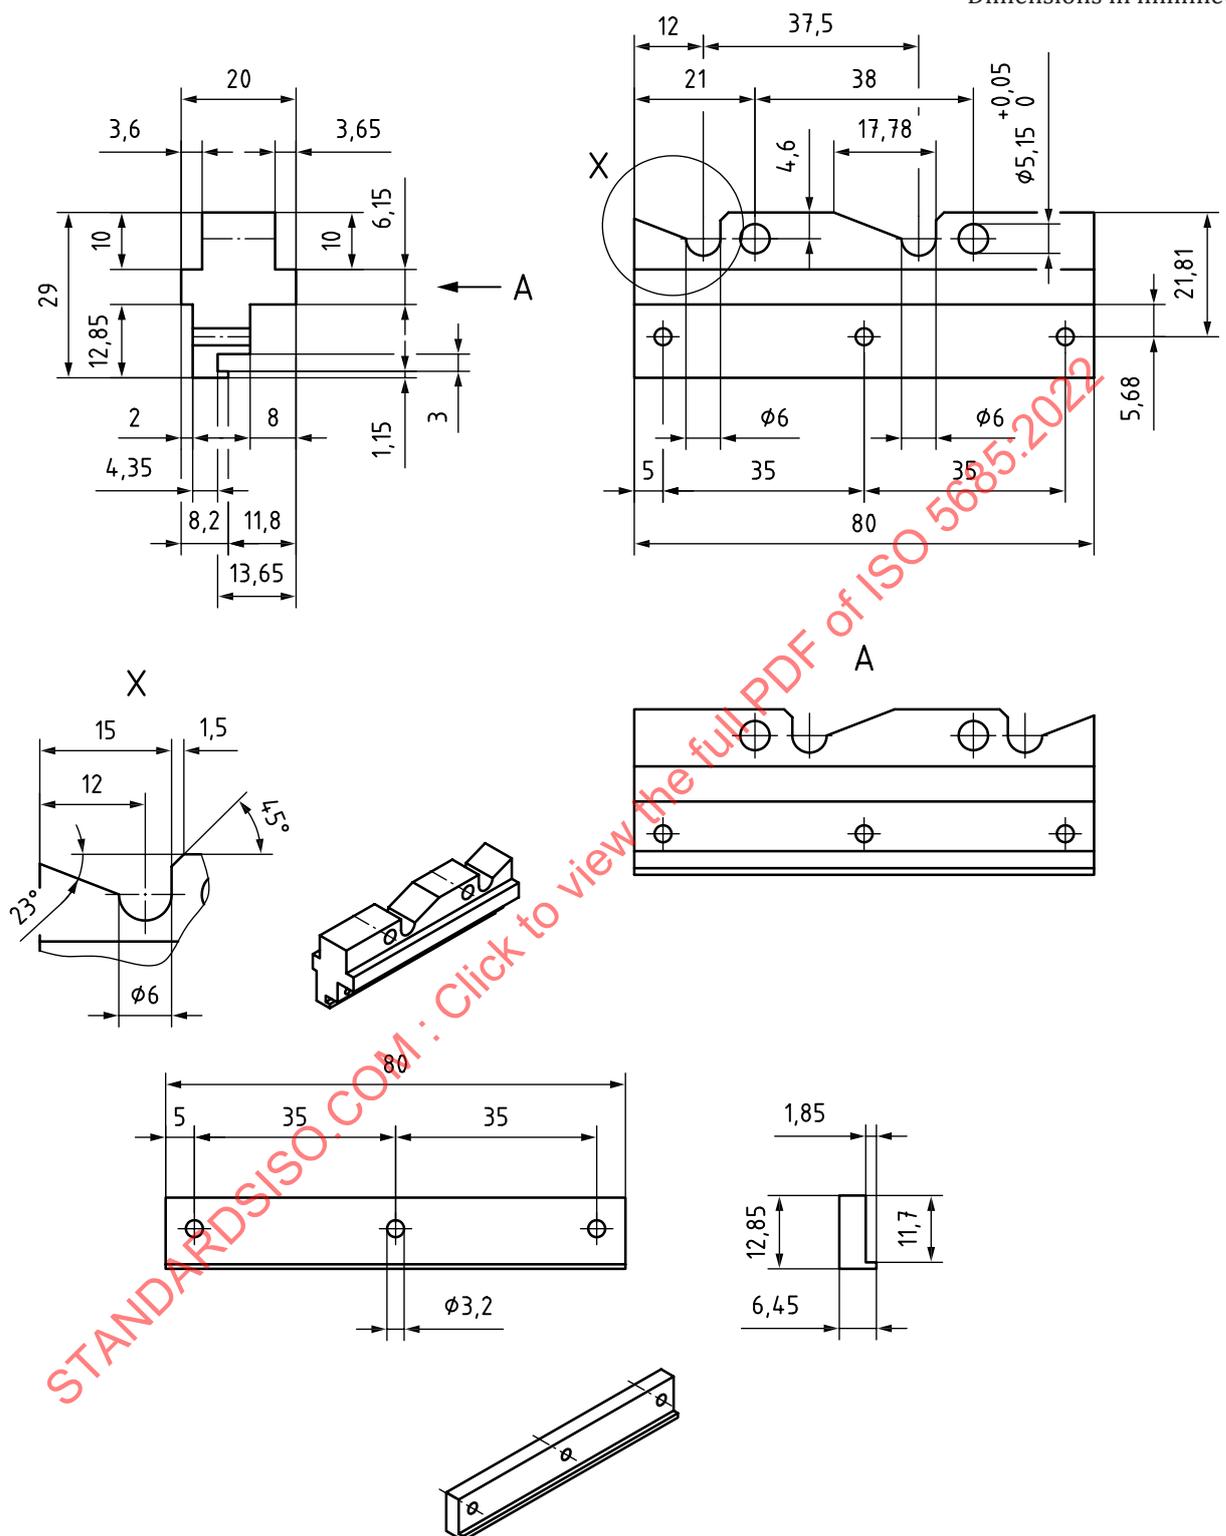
Drawing of the wiper rubber holder (see also [Figure 5](#))
